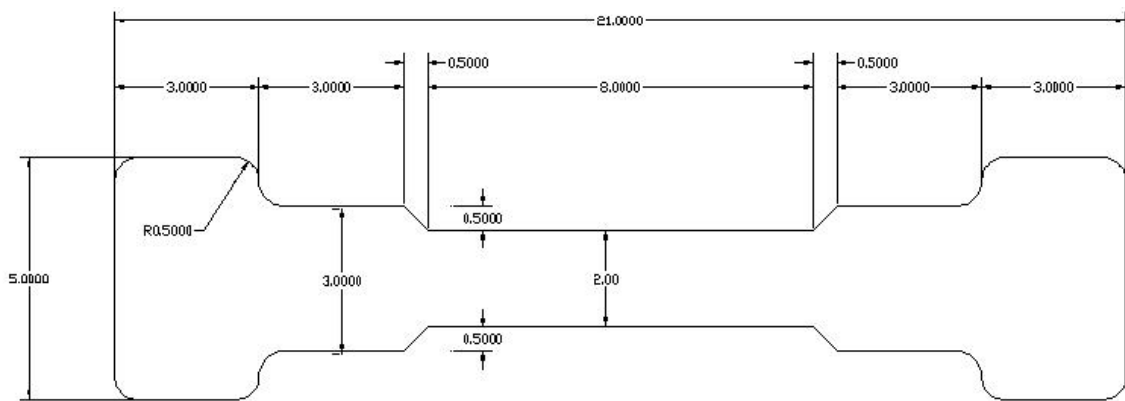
Specimen dimension of tensile dogbone specimens (inch)
